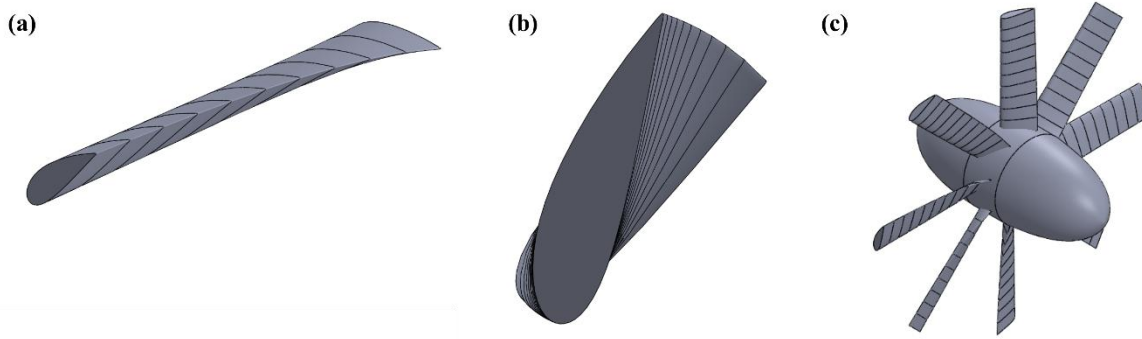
Blade views integrated into the rotor. (a) isometric view, (b) front view displaying the stagger angles, (c) eight lofted blades attached to the hub of the rotor (isometric view).
